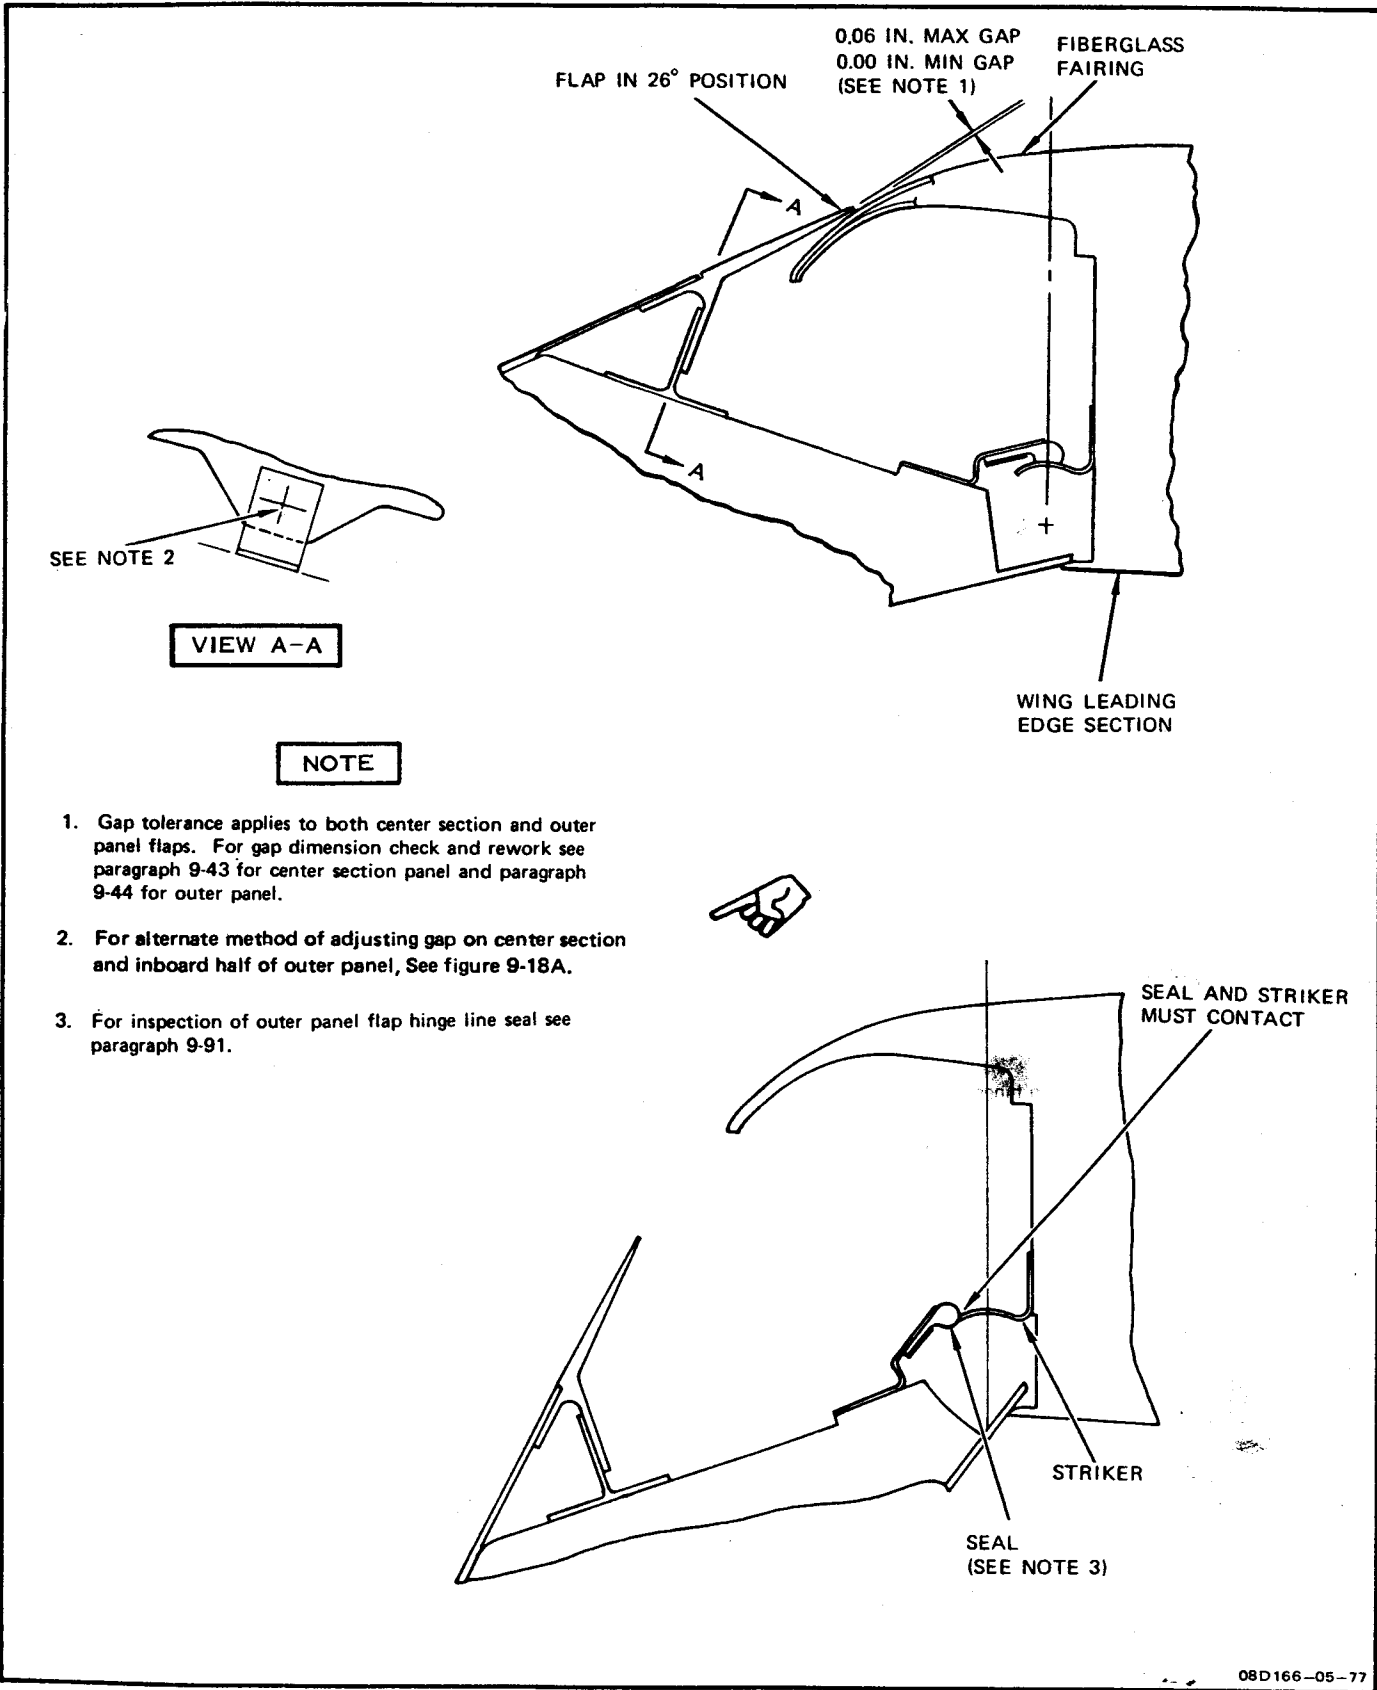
Leading Edge Flap Overlap/Gap Dimension and Outer Panel Hinge Line Seal Inspection
